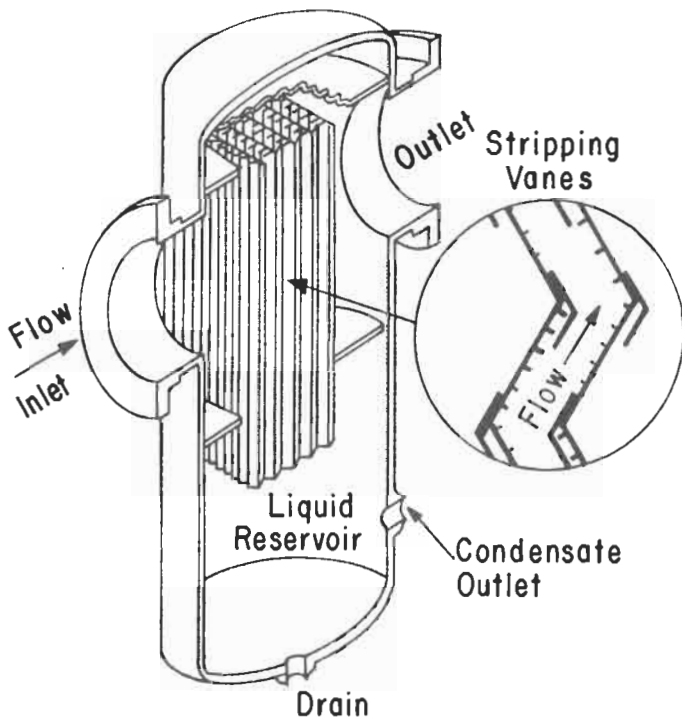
Impingement separator. Courtesy of Peerless Manufacturing Co.
